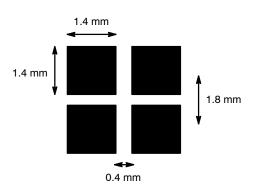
Solder Footprint used for the MicroFM-30035-SMT Sensor used in the Test Array
